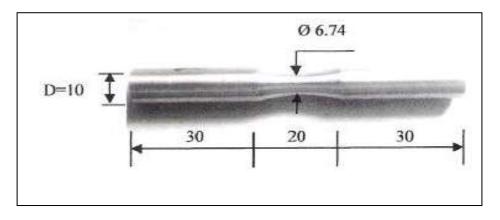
Geometry of fatigue specimens dimensions in millimeter according to (DIN 50113) used standard specification.
